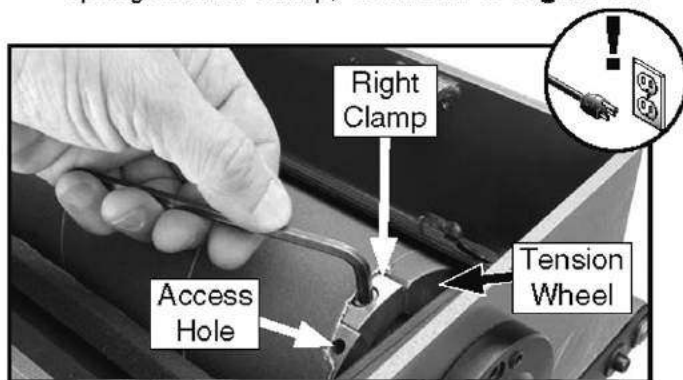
Example of loosening cap screw on right spring-loaded clamp (dust hood removed for clarity).
